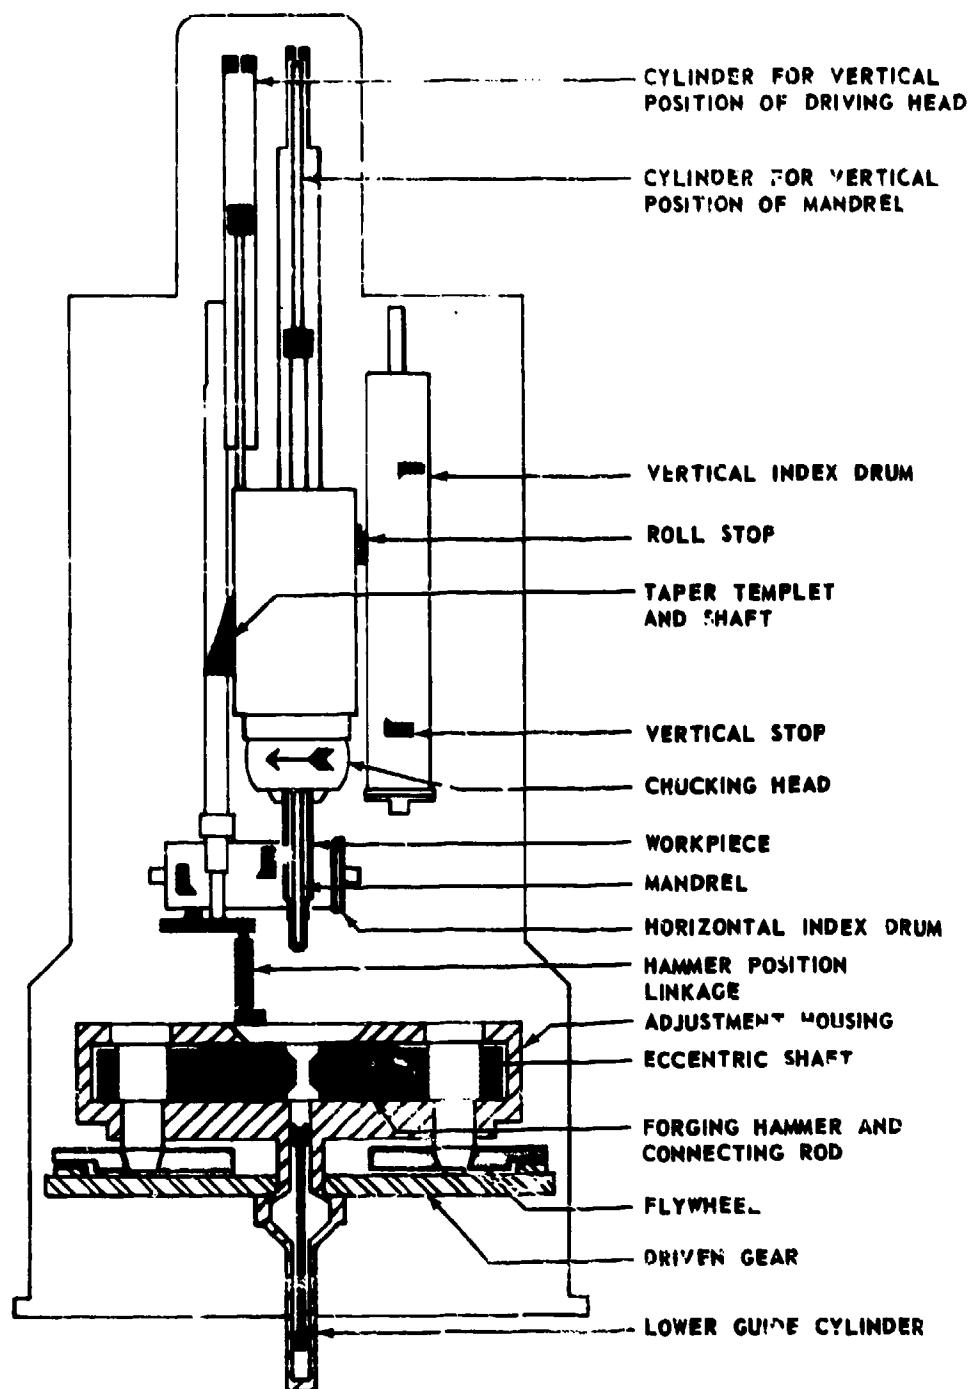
CUTAWAY DRAWING ILLUSTRATING THE BASIC OPERATING FEATURES OF A ROTARY FORGING MACHINE
